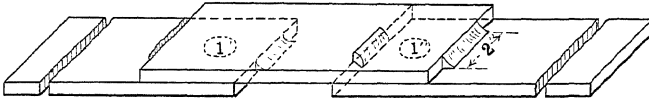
FILLET AND SPOT WELDED.
